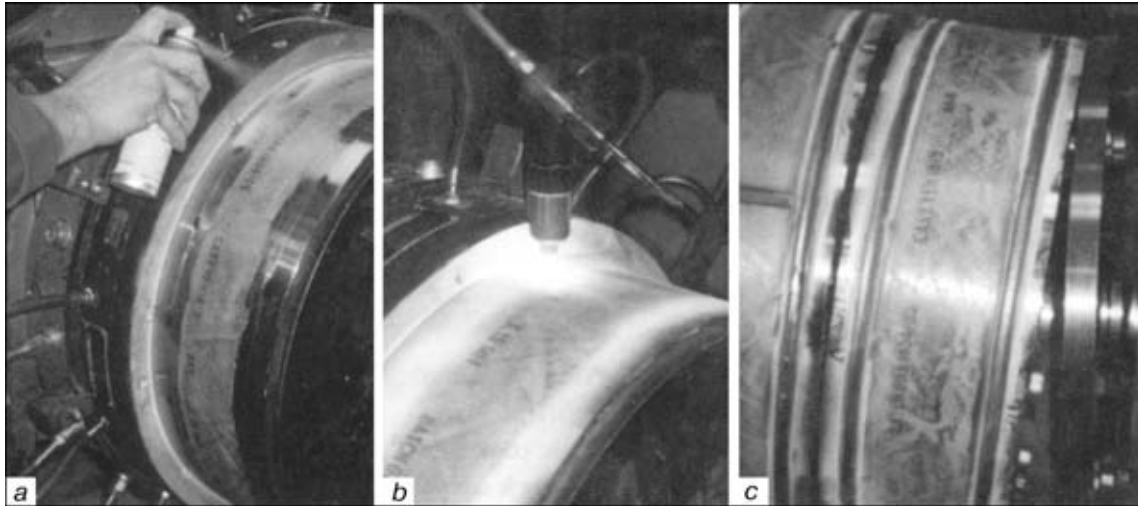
A-TIG welding of a component of the gas turbine engine cylindrical casing made from nickel alloy Nimonic-75, 3.25 mm thick [16]: *a* – manual application of the aerosol activator to a joint prior to welding; *b* – mechanized A-TIG welding; *c* – weld
